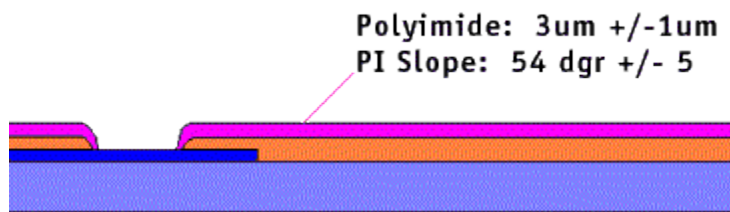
Polyimide dielectric layer is deposited and patterned to open bond pads while sealing fuse openings.
